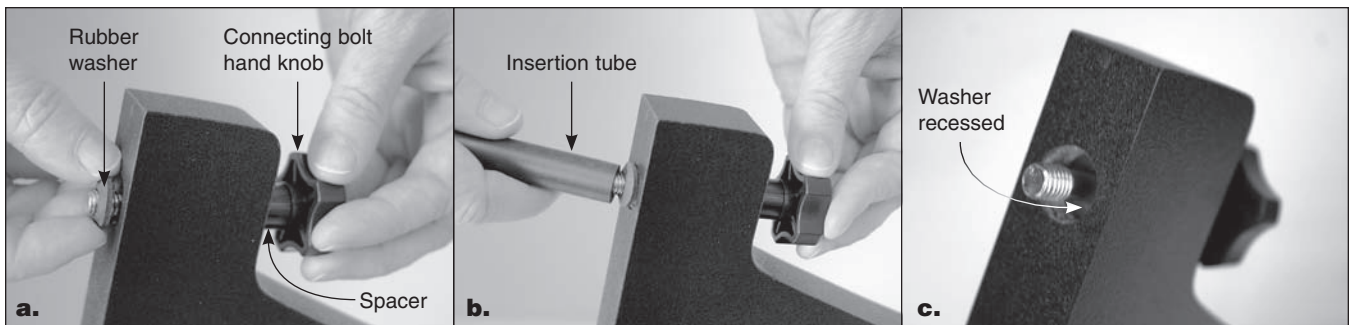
(a) Place a rubber washer on the threaded end of the connecting bolt and push it on as far as you can with your fingers. (b) Then use the included insertion tube to push the washer past the threads on the bolt and up into the counterbored hole in the wood. (c) The recessed washer will keep the bolt captive in the hole.
